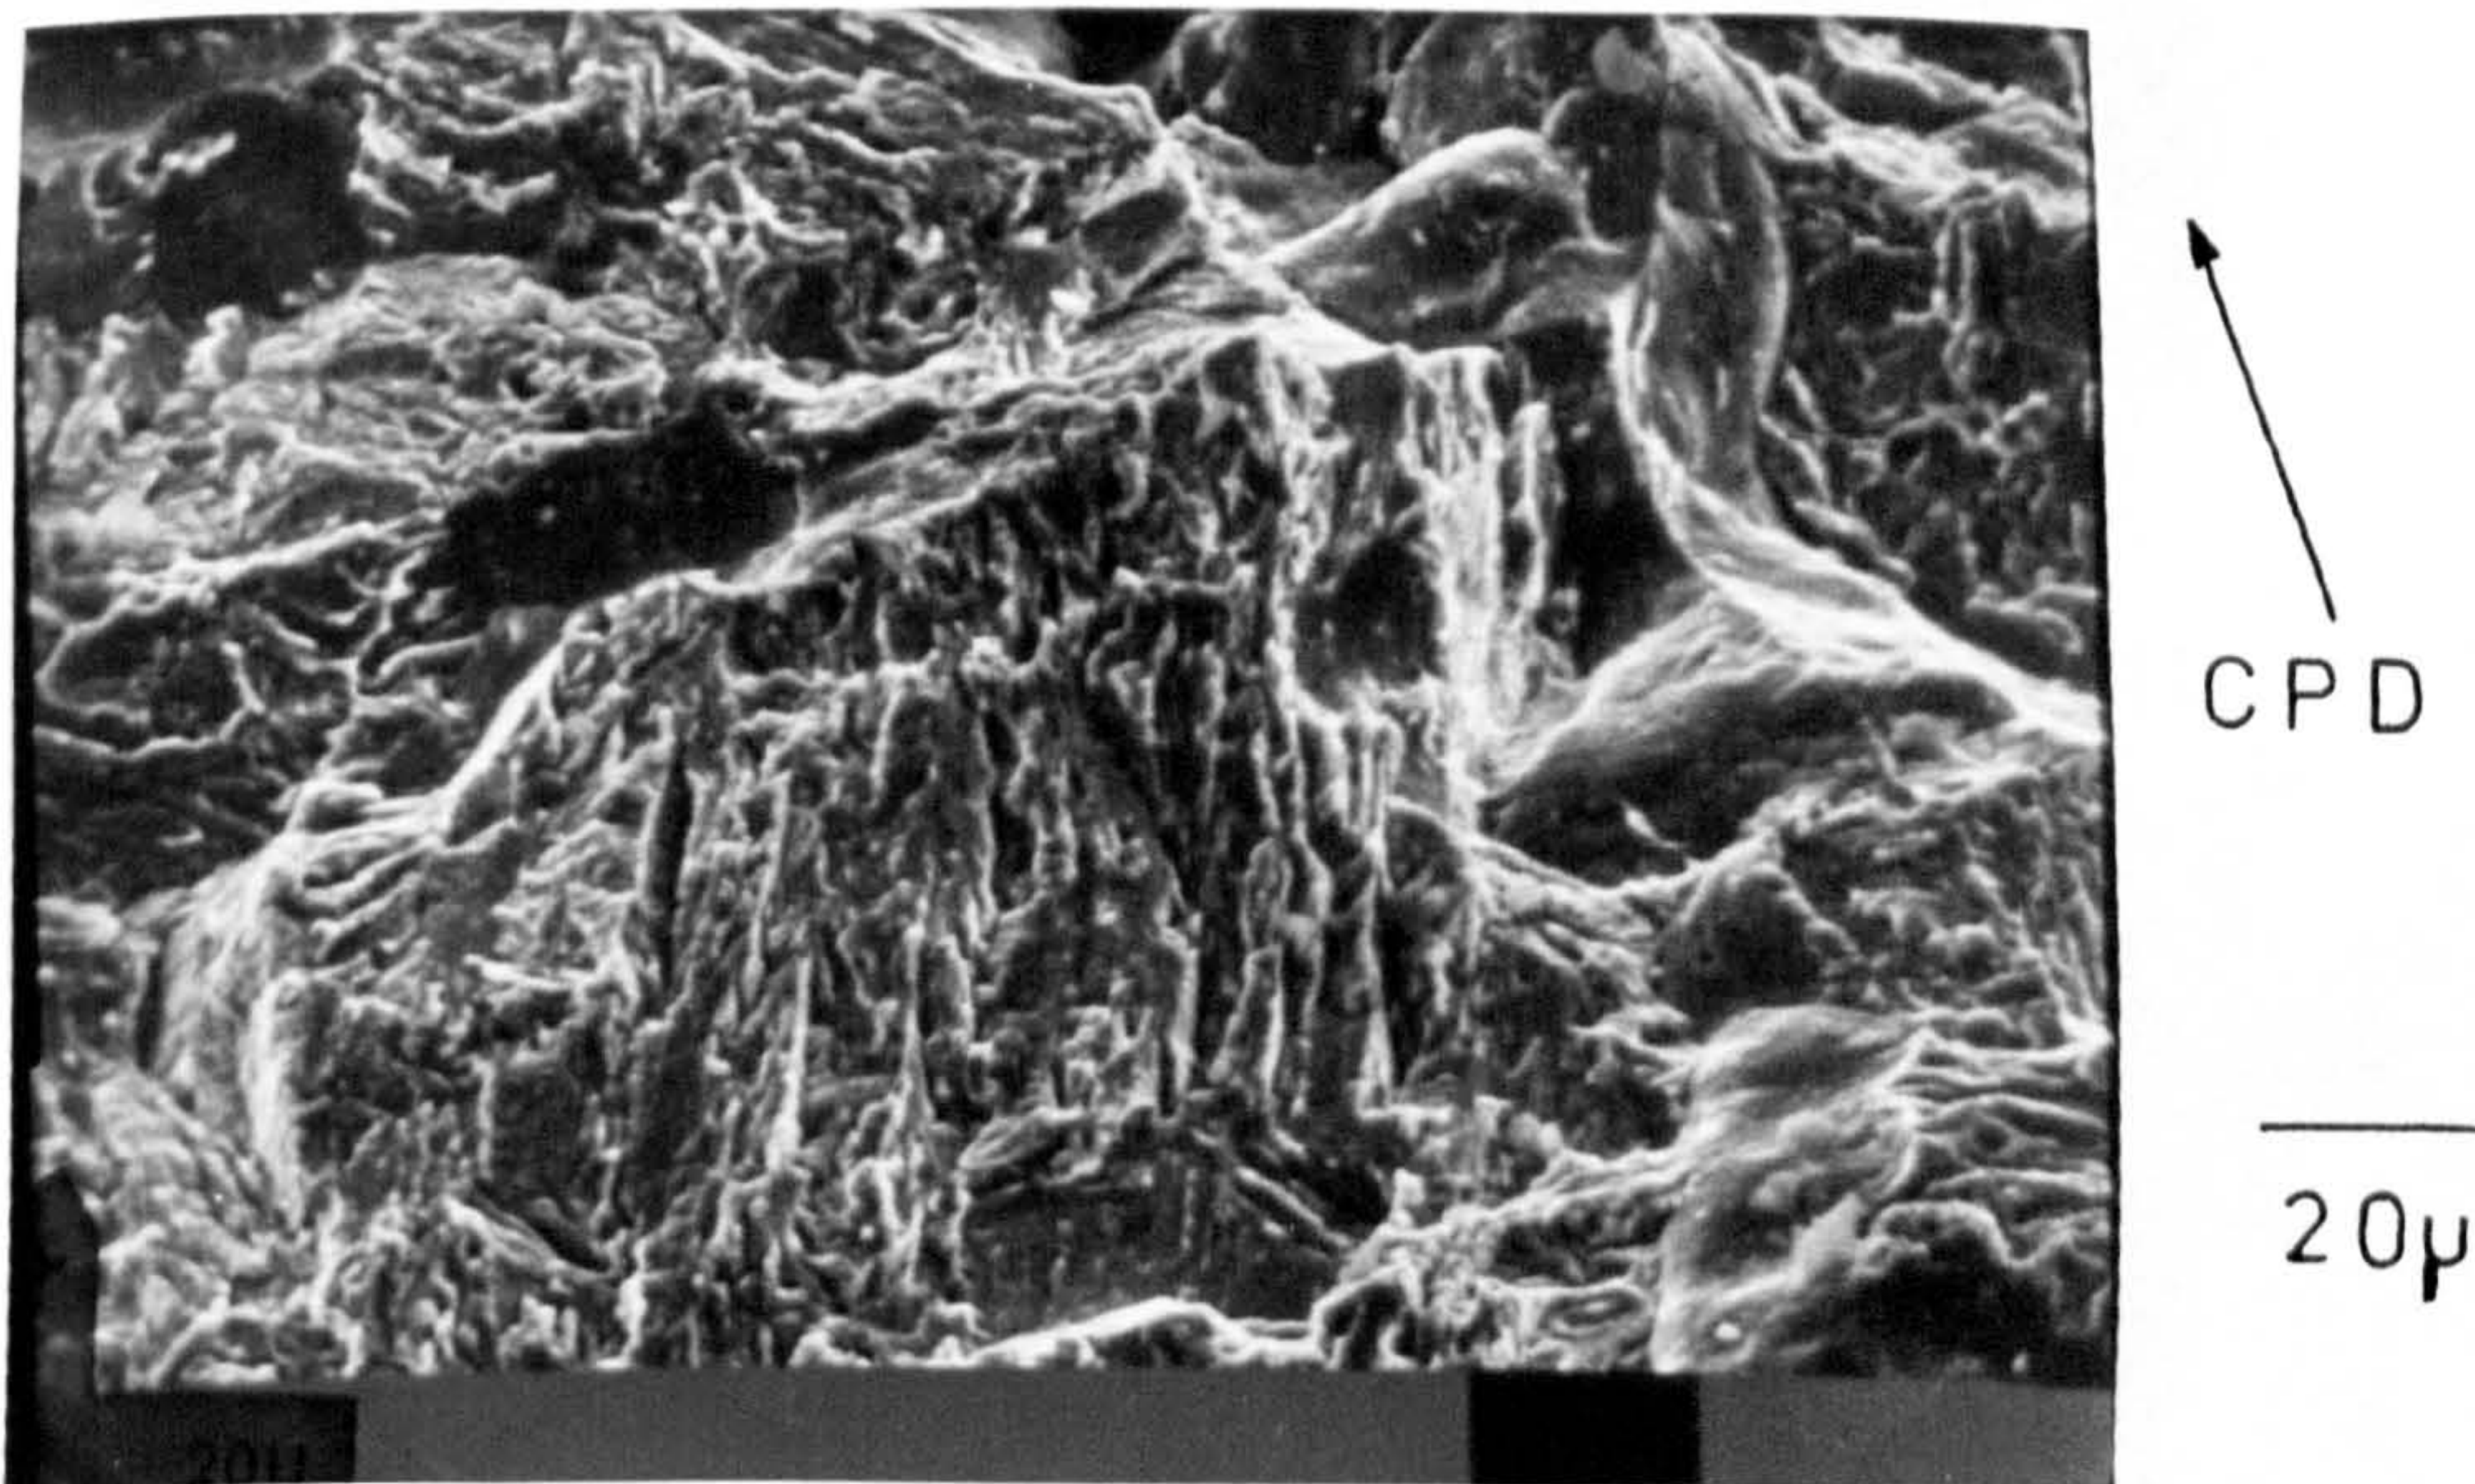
Fracture surface of heat treated material, -1400 mV (S.C.E.), crack side covered, central position ($\Delta K = 27 \text{ MPa}/\text{m}$)
